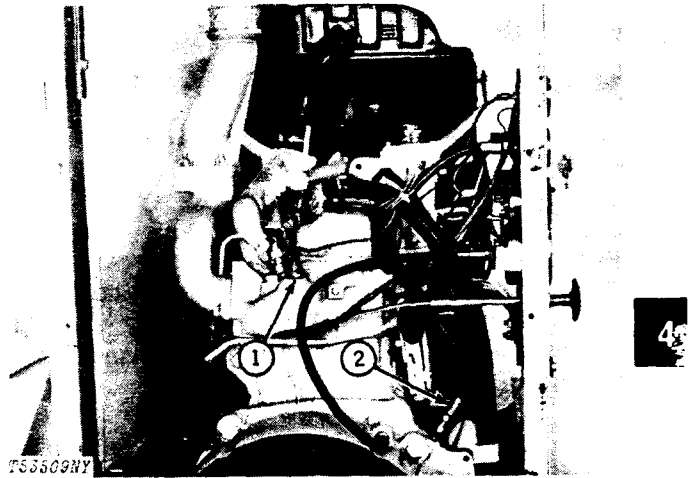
Oil Pressure Hose and Temperature Sending Unit
